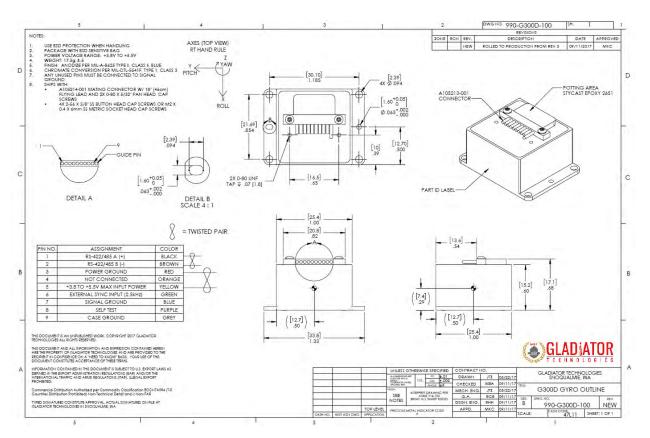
Standard G300D Triaxial Digital Gyro Outline Drawing
